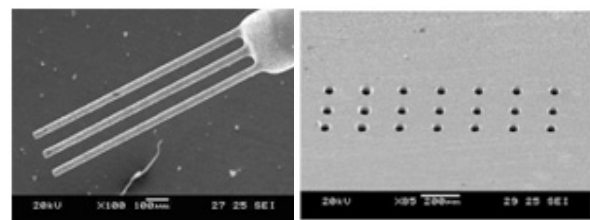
Micro hole array fabricated using multiple electrodes [80]
